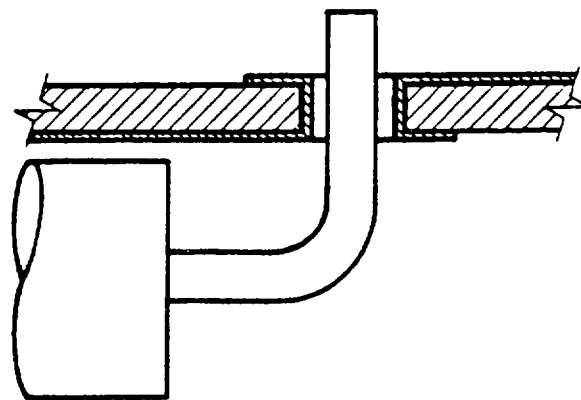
Pierced or perforated terminal, continuous run weaving, solder connection (continued).
